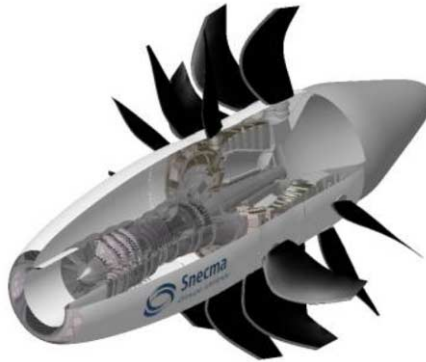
Cross-sectional drawing of the Snecma Counter Rotating Open Rotor.
